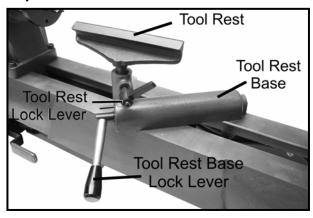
Adjusting Carriage & Tool Rest on the Bed
